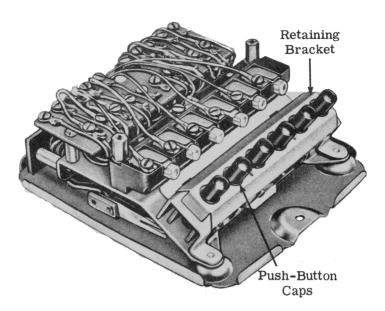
Key Assembly Showing Retaining Bracket and Push-Button Caps
